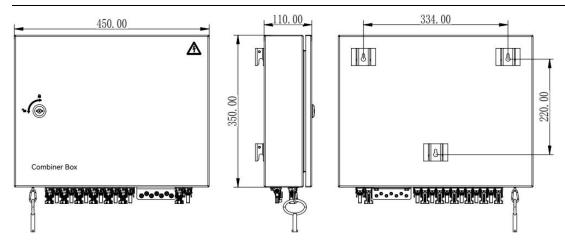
Dimensions of the CB-03A06S-A Combiner Box
